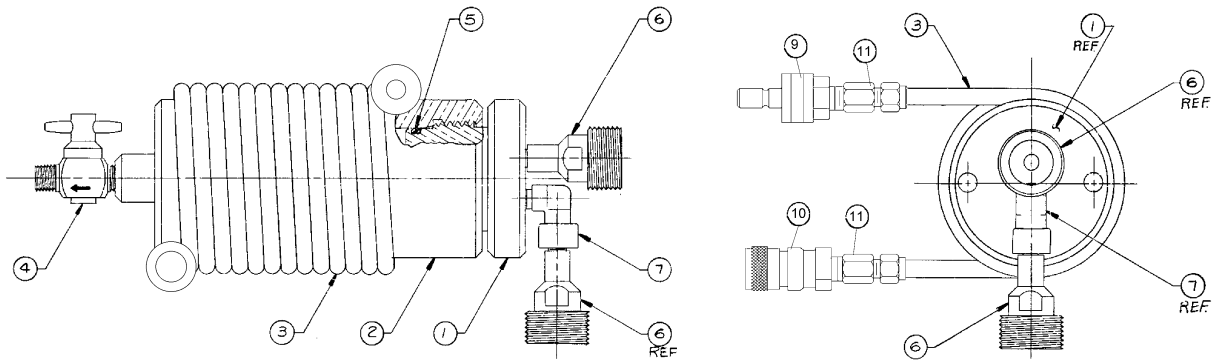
Filtrate Chamber Assembly, Standard
